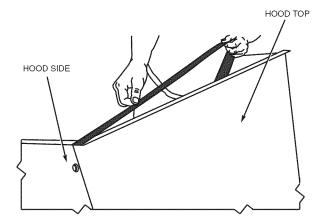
Adding Seal Strip to Back of Hood Top Mounting Flange
